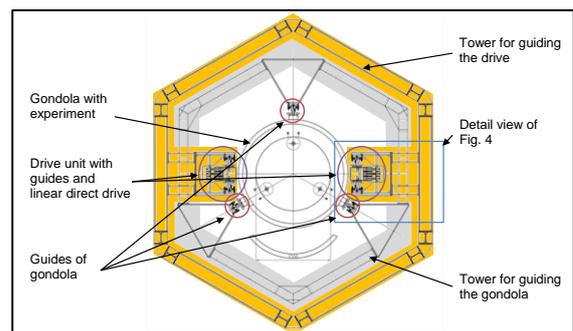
Arrangement of guides (horizontal cut through the towers)
